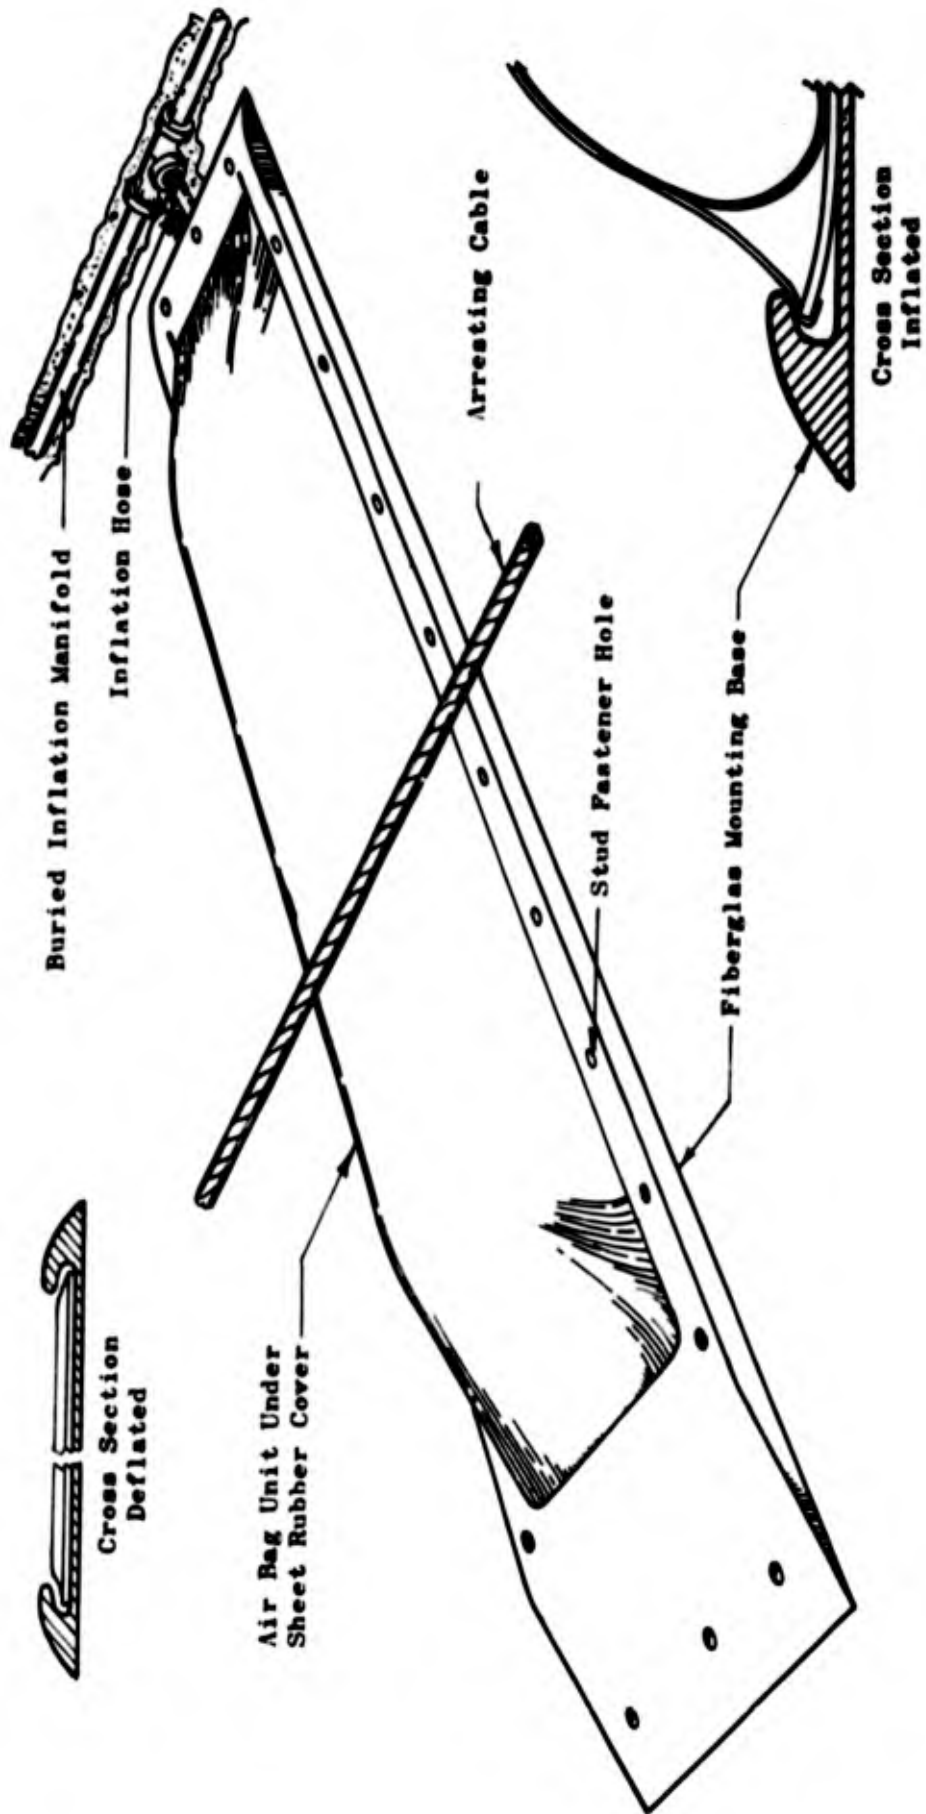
INFLATABLE CABLE SUPPORT - DESIGN III
